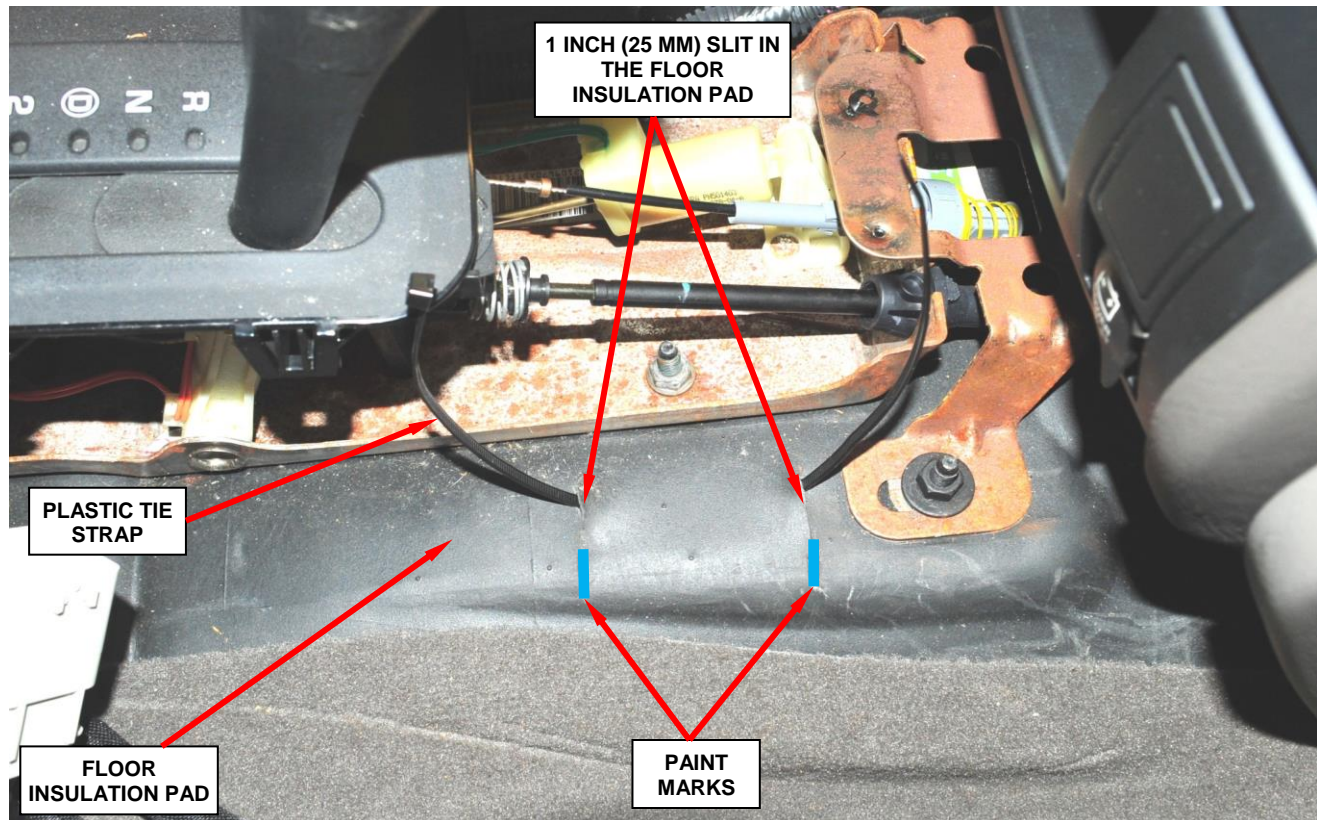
Cut Slits in Floor Insulation Pad and Install Tie Strap
